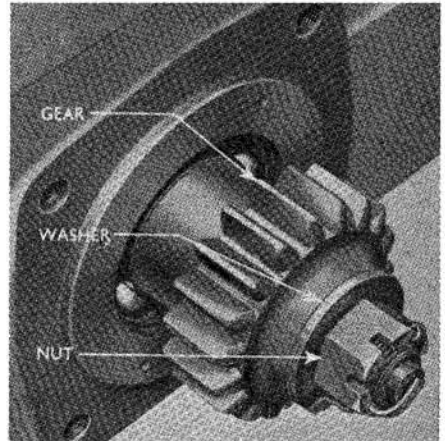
View of PTO drive shaft and drive gear with raised PTO assembly removed. Latest shaft has gear retaining snap ring instead of nut.
